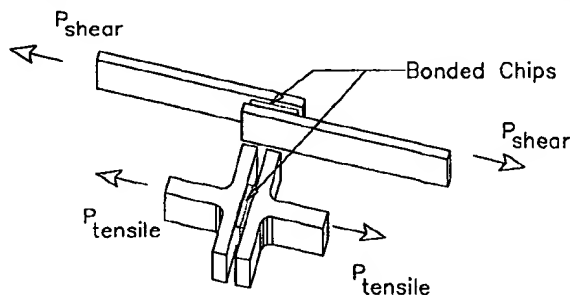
Fixtures used for testing the mechanical properties of indium solder joints. The top figure is used to test the shear strength of the bumps, while the bottom is used to test the tensile strength.
